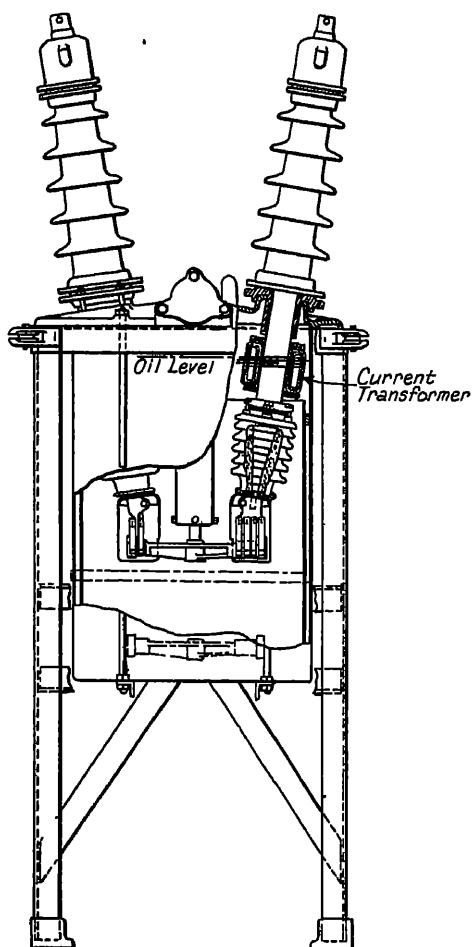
A ENLARGED END VIEW OF CIRCUIT BREAKER
